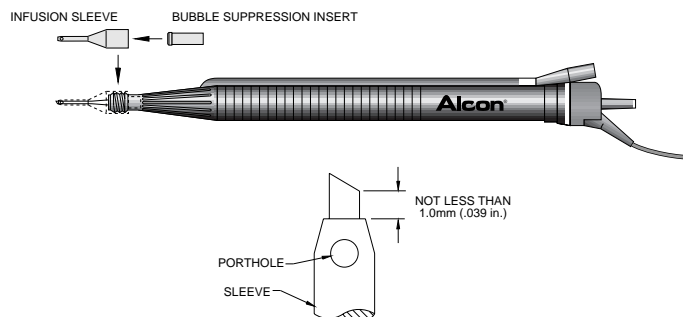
ULTRASONIC HANDPIECE (375-40) WITH INFUSION SLEEVE AND BUBBLE SUPPRESSION INSERT
